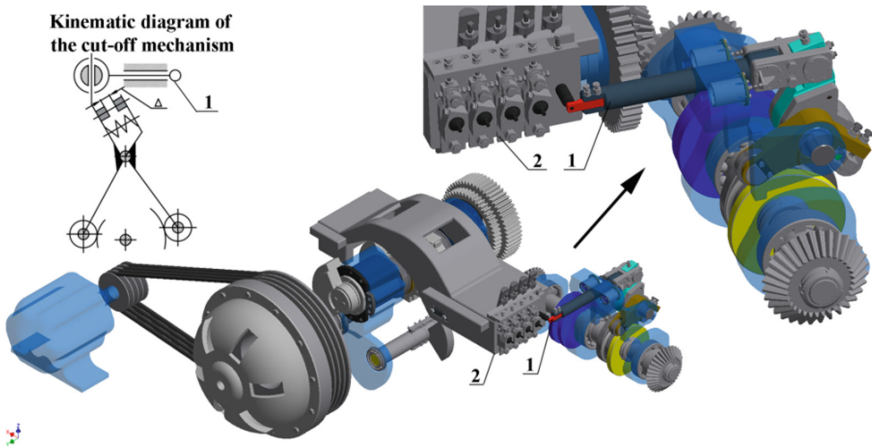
3D model CSM AV 1818—cut-off mechanisms, the main landing, and their drive. Executive links: 1—the cut-off mechanism (knife stock), 2—the landing gear (slider)
